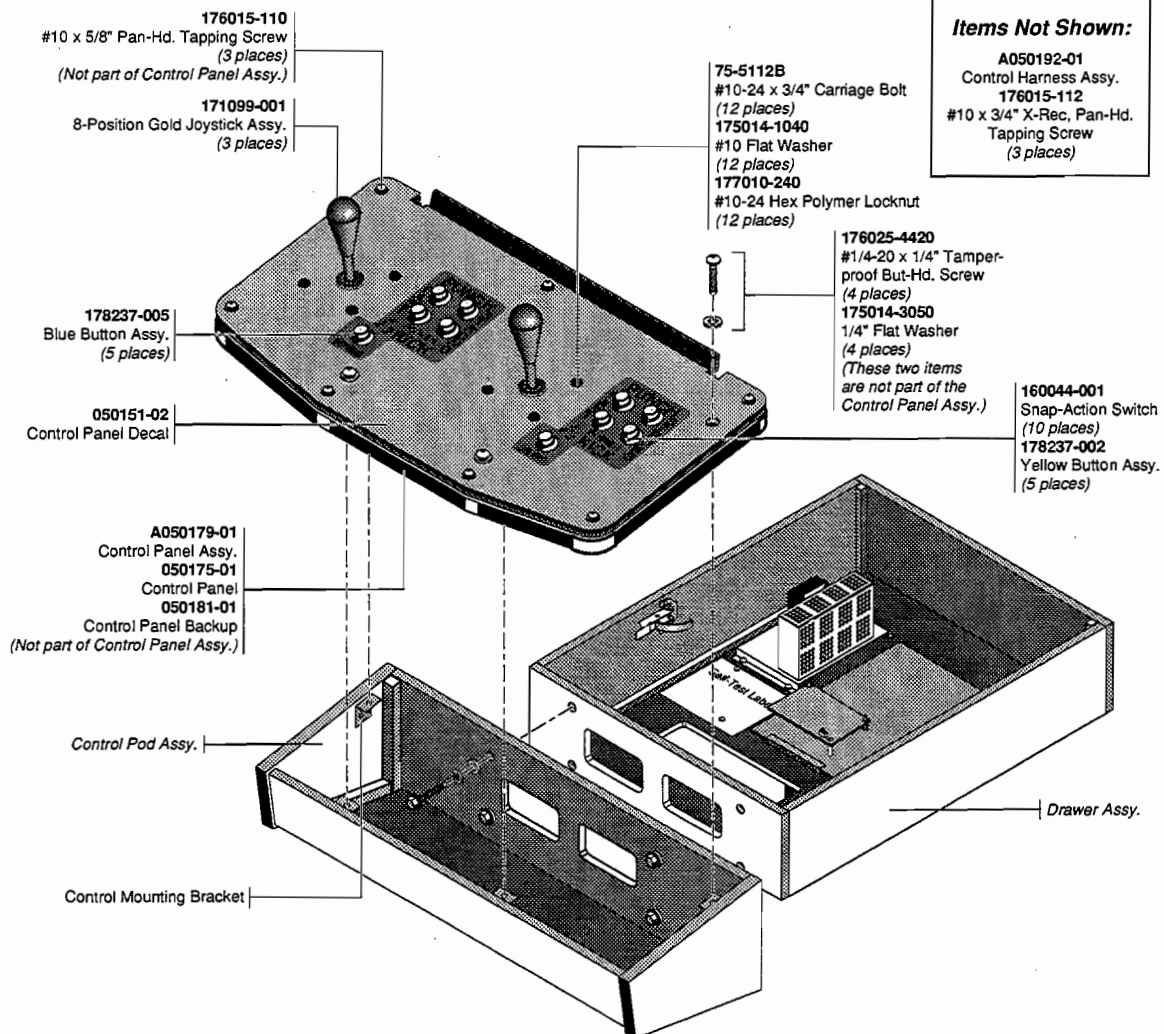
Cabinet-Mounted Assemblies, Front View
